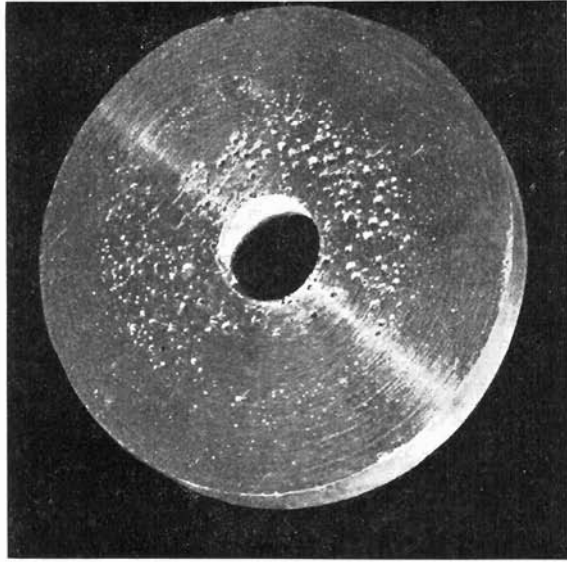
Large gas holes in a 10% tin-bronze sand casting.
